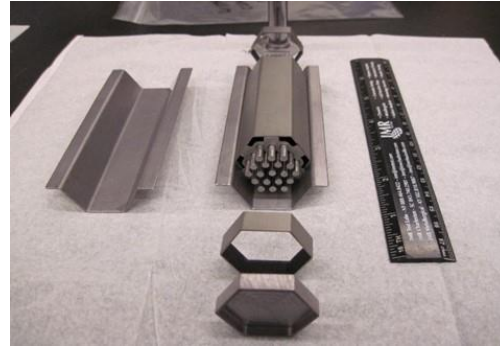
Images showing the 6" long 19-hole W-UO<sub>2</sub> HIP can assembly prior to, during, and after welding
